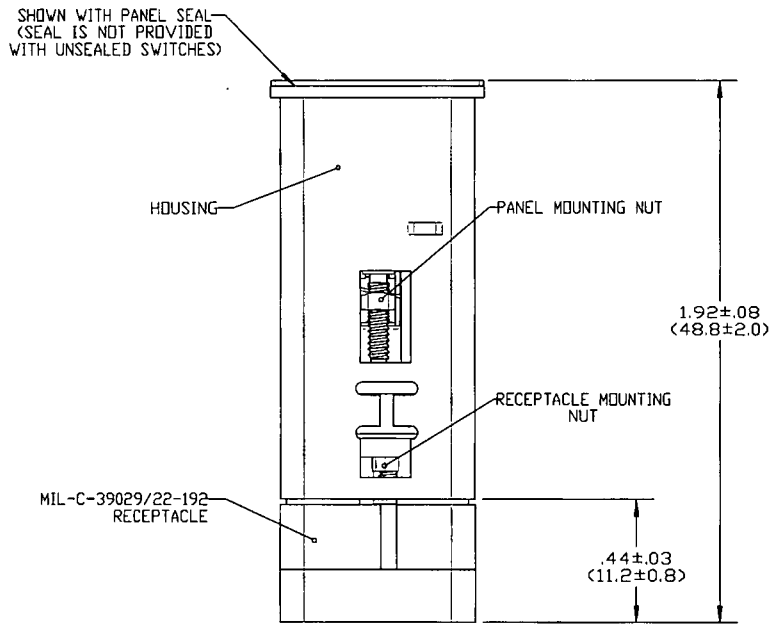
Model 9821 through 9825 Assembly Shown with Panel Seal and without Sleeve or Spacers
